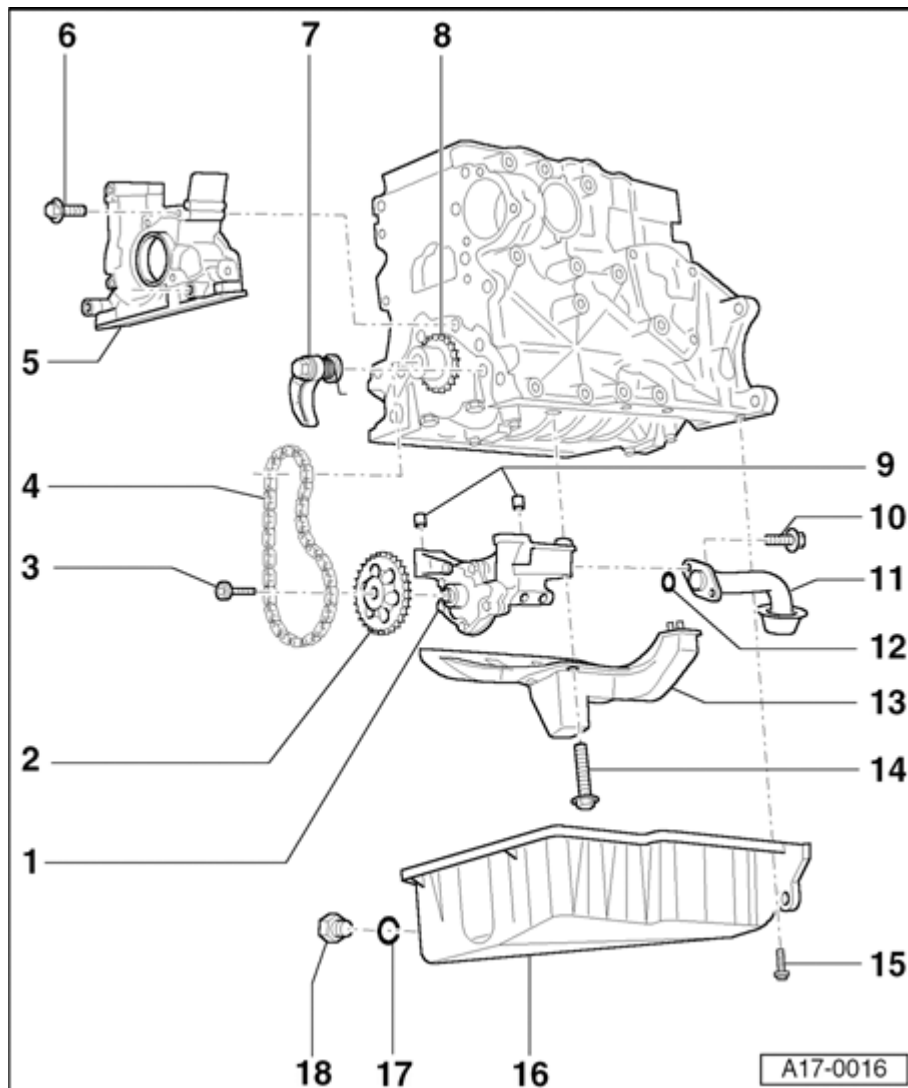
Lubrication System Components, Removing And Installing Overview - Part I
